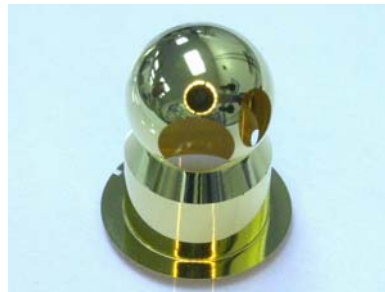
Hohlraum machined to be driven by Z machine for Cibola experiments at SNL.
